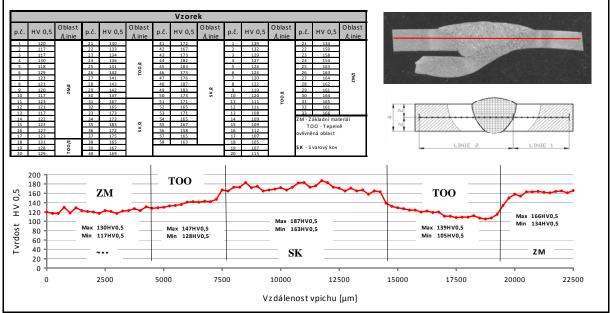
Behavior of hardness measurement near pressure vessel weld
